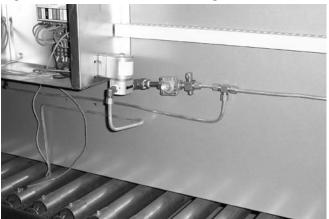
Double Pilot Tubing Run 13 - 21 Sect
